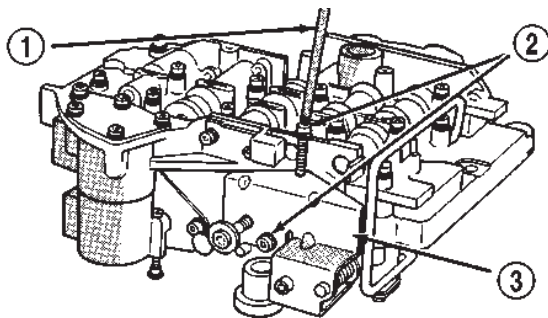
Adjusting Screw Bracket Fastener J9321-430
